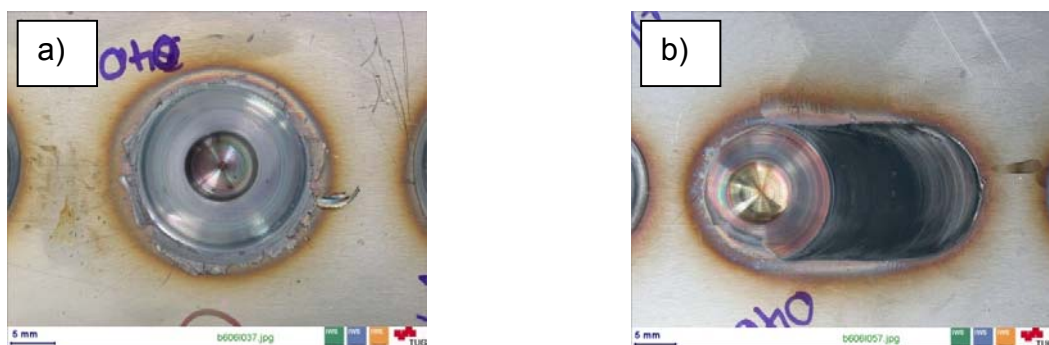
a) Spot weld and b) 20mm long linear weld experiment in steel DIN 1.4301
